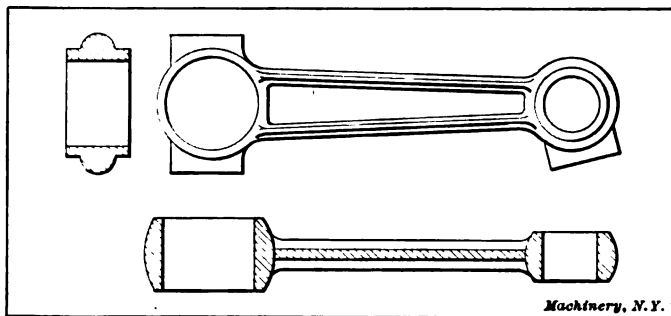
Connecting-rod Forging, after Machining, to illustrate a Case where Parts of the Die Impression should be milled and typed before the Hub Impressions are milled
